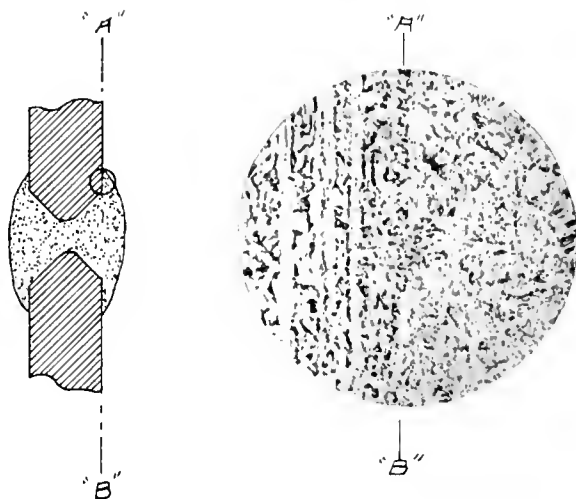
Section of a Weld Made with a Current Between 150 and 160 Amperes
